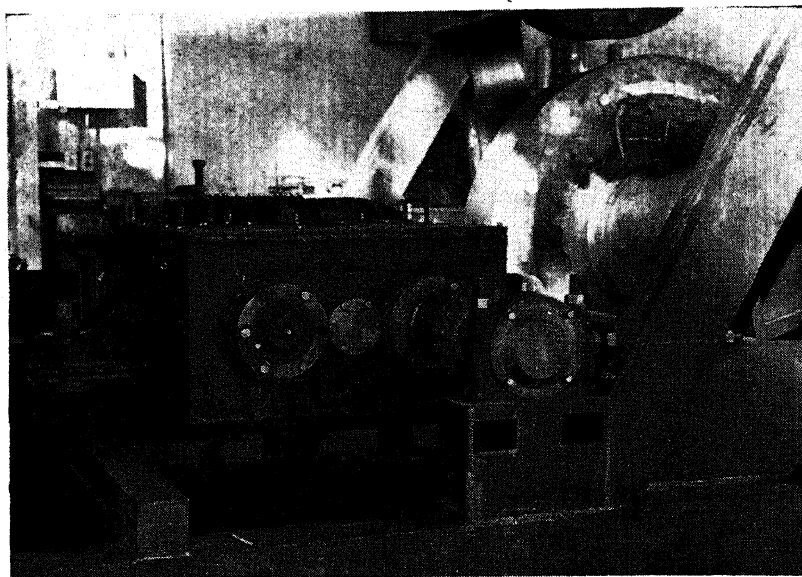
Close-up of a welded steel rotary draw-works showing speed reducer and other interesting design details.
